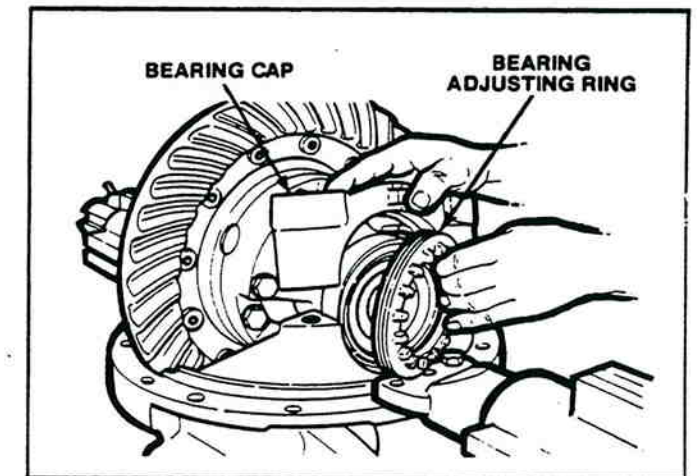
Removing Bearing Cap And Adjusting Ring.
